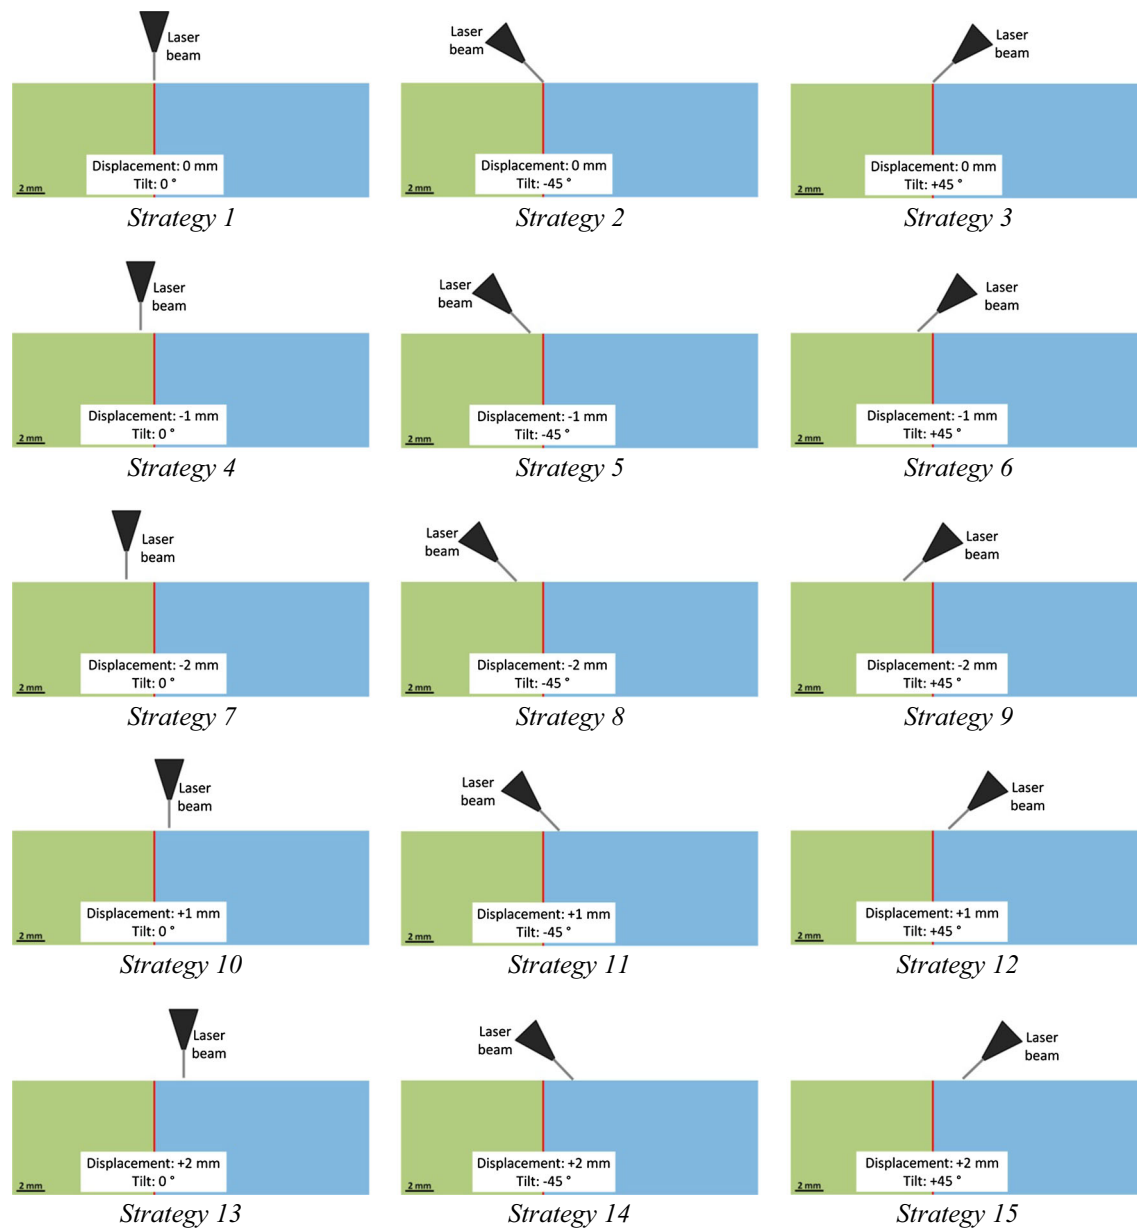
Welding strategies (displacements and tilting of the laser beam) used in the simulations of laser keyhole welding of dissimilar metals.
